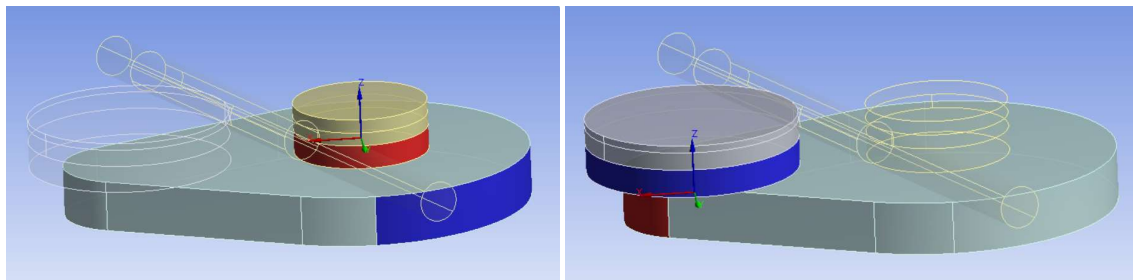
Location of revolute joints in the model assembly, the red and blue faces indicate the faces connected by the joint. The mandrel is connected to the connecting link (left), and the connecting link is connected to the bending pin by the second joint (right).
